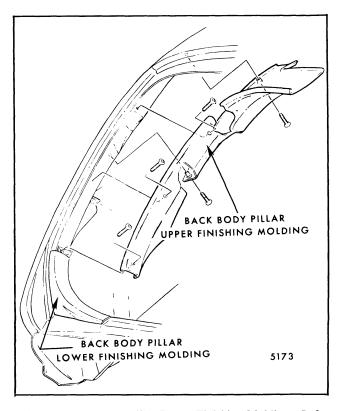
Back Body Pillar Upper Finishing Molding - Left Side Shown
